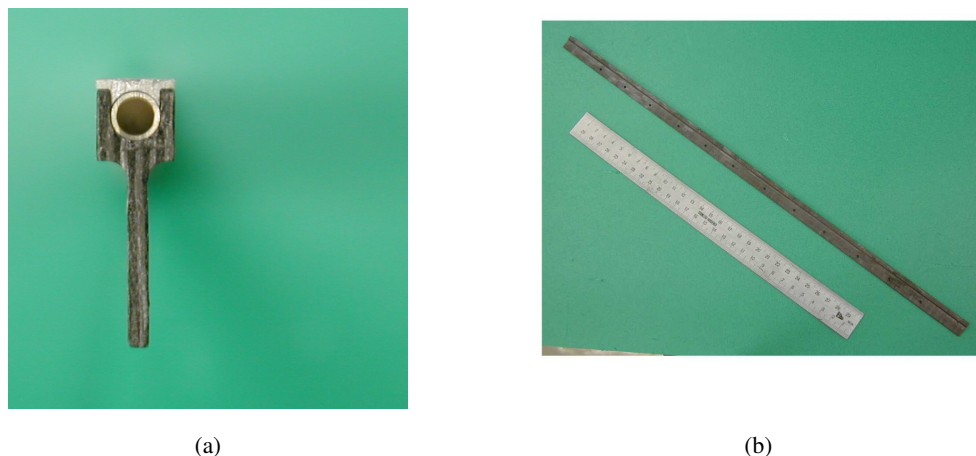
Cross-sectional photograph of a prototype CC2D cooling plate, following machining. The cooling plate design and pipe diameter have evolved slightly following this prototype. (b) Longitudinal view of the same cooling plate. The ruler length is 30 cm.
